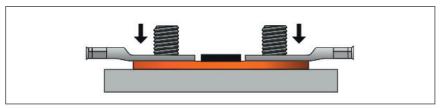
HV BM 1.2+S, braided shield HV-, placing the ring terminals on the threaded bolts
